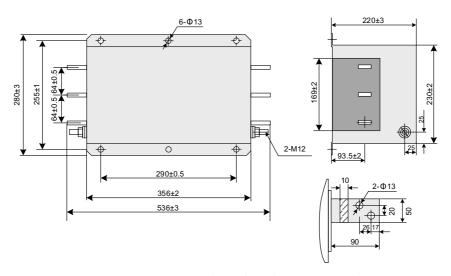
Dimensions of Jianli filters (1000 A, unit: mm)
